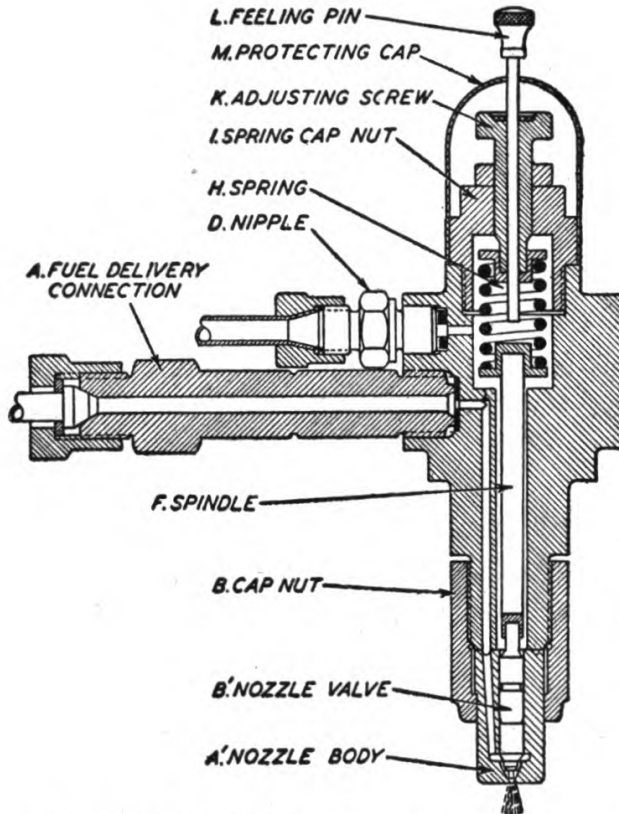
Section of Bosch Spray Valve Holder with Open Pintle Nozzle
